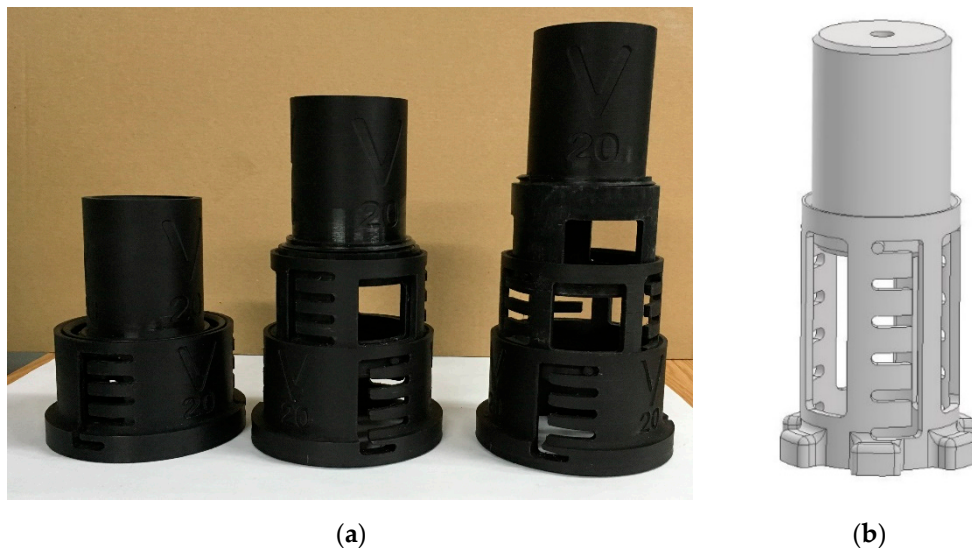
View of the structure of shaped charges: (a) first design of the shaped charge prototype and (b) final design of the shaped charge construction.
